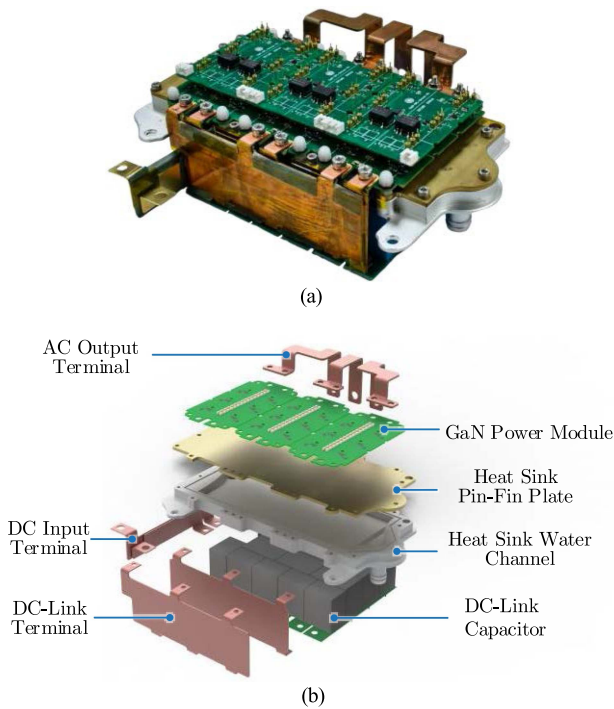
Designed GaN traction inverter. (a) Prototype and (b) 3D exploded view.
